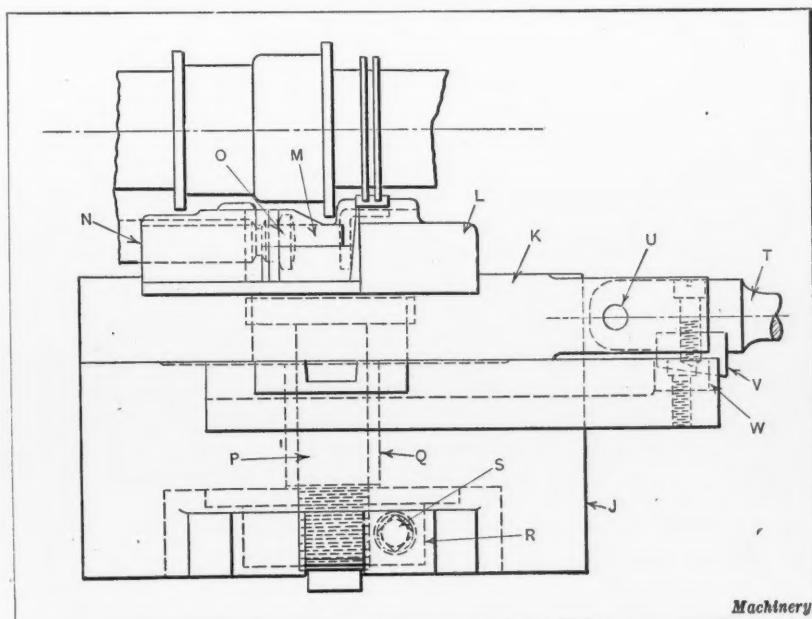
Front View of Milling Fixture shown in Plan View in Fig. 4
